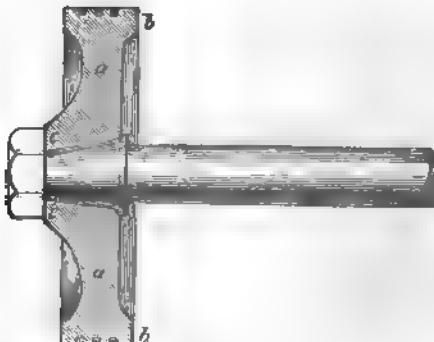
The Piston of a small double-acting steam engine, showing method of connecting the piston rod, and the position of the packing rings. The parts are: *a*, *a*, the body of the piston; *b*, *b*, the circumference bearing the packing rings; *c*, *c*, the central boss receiving the coned end of the rod
